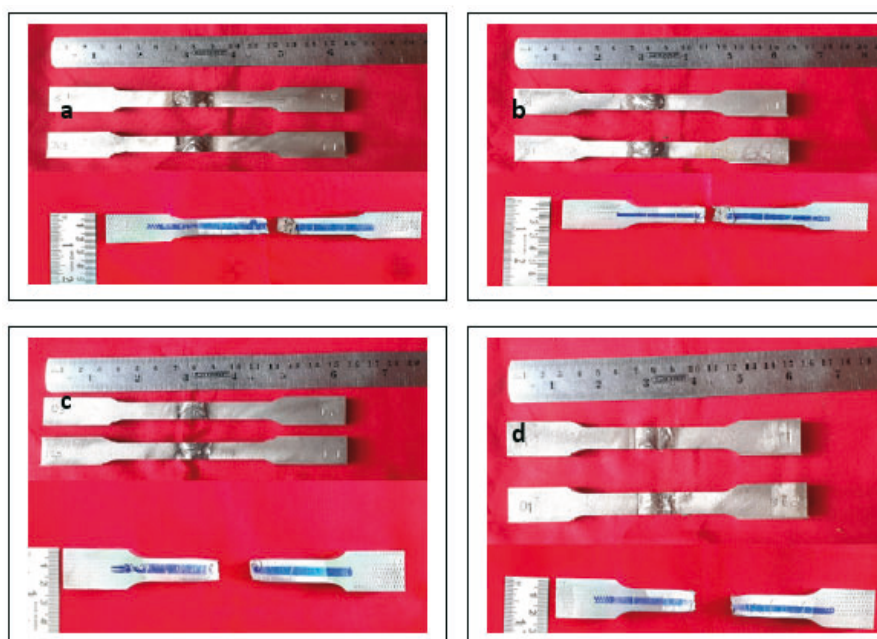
Locations of tensile fracture in specimens before and after the test (a) CC-GMAW; (b) PC-GMAW; (c) DPC-GMAW; and (d) CMT-GMAW
